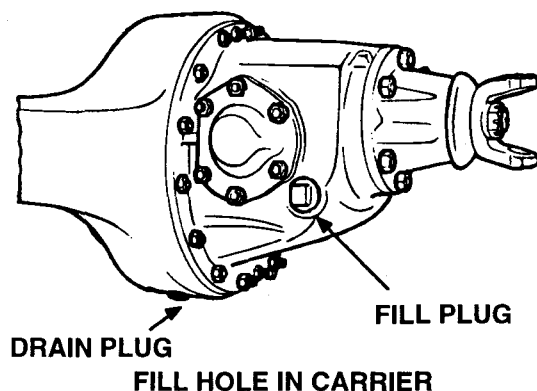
FRONT MOUNTED SINGLE REDUCTION TANDEM AXLES
